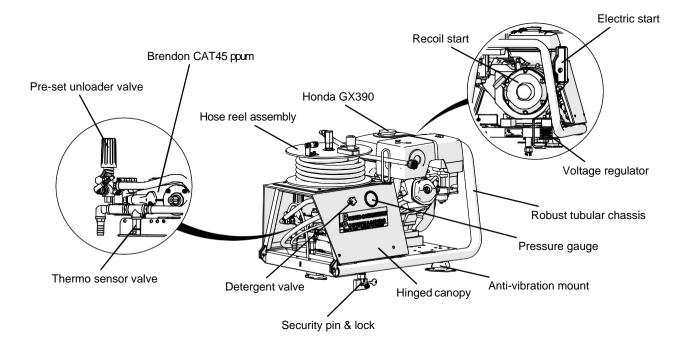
m mild steel enclosure complete with Varta B34 12v battery.
